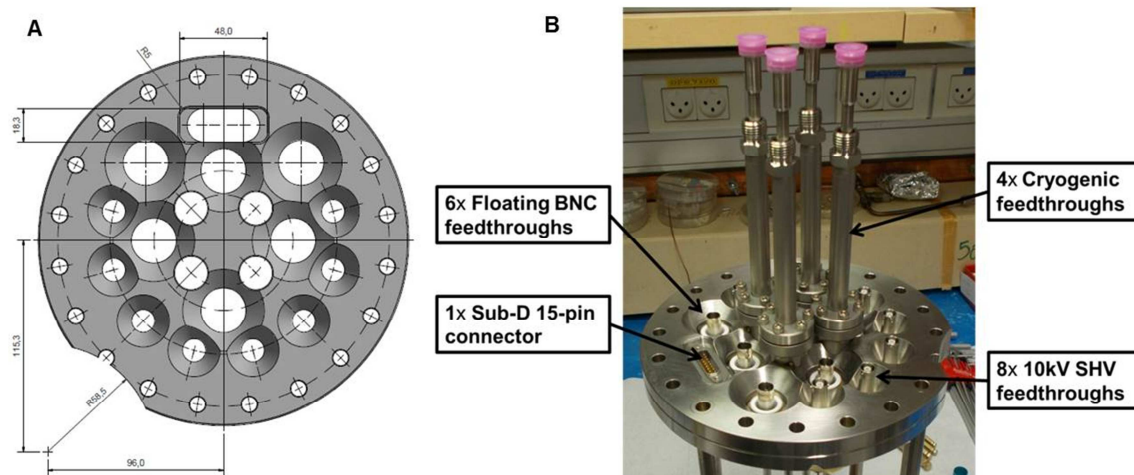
A – Autodesk Inventor design for the CNC machining of the 8” CF flange and, B – Photograph of the machined 8” CF with the welded SHV, BNC, Sub-D feedthroughs and installed cryogenic gas feedthroughs.
